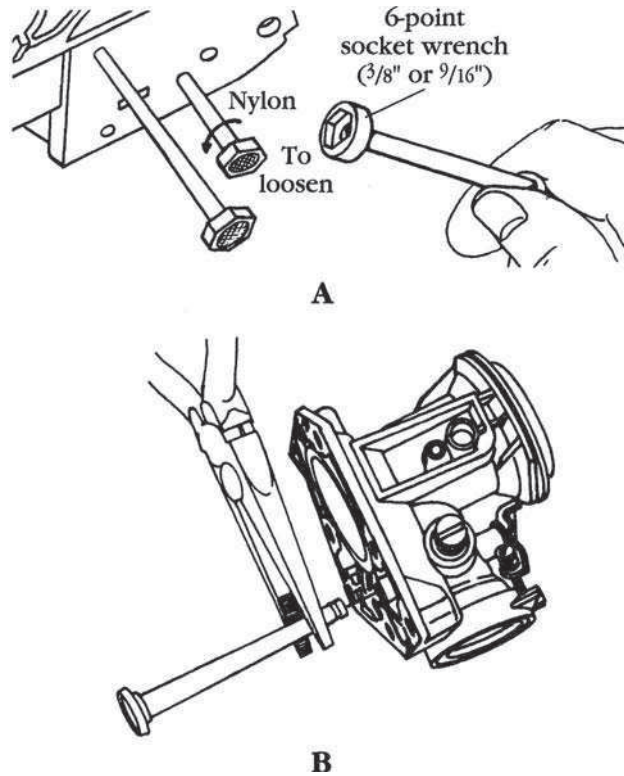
Fuel pipes twist in and out of metallic carburetor castings (A). Pipes for nylon carburetors incorporate a snap lock (B). Briggs & Stratton Corp.
